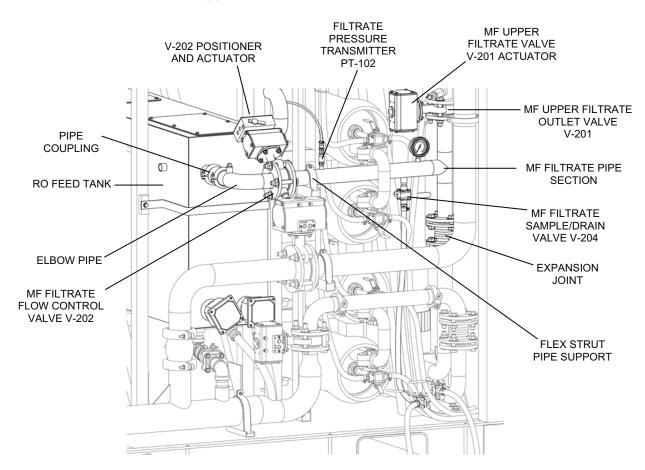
MF-Filtrate-to-RO Feed Tank Pipe Section Removal.
